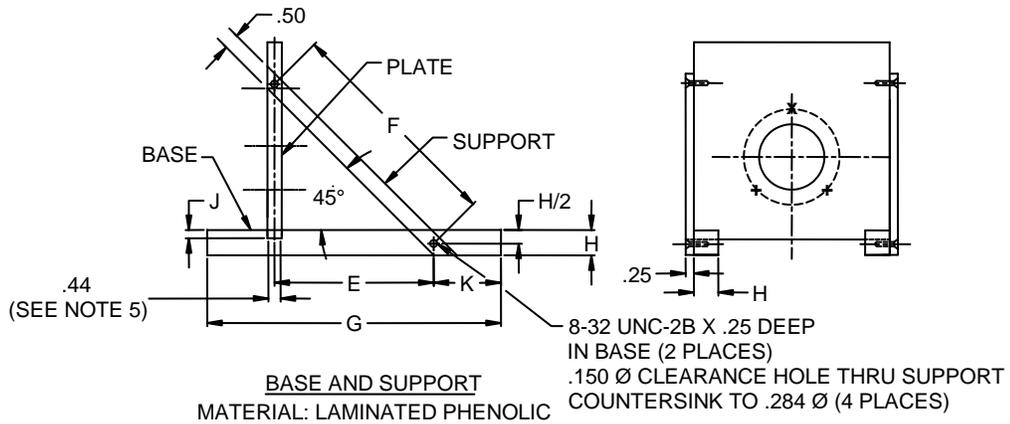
Standard test fixture for servocomponents up to size 18 – Continued.
